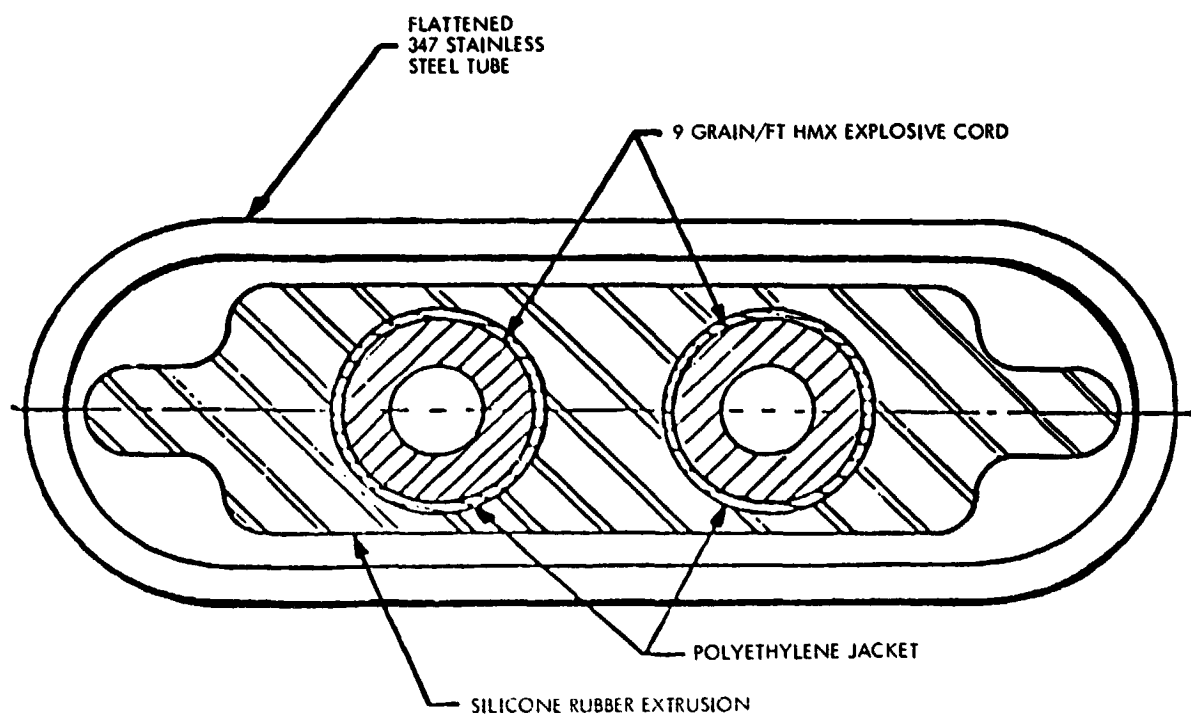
Super Zip Explosive Cord and Tube Assembly
